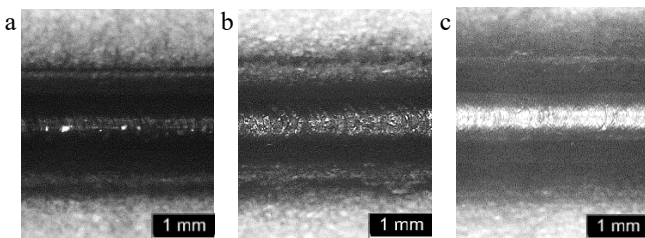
Upper views of the weld beads: (a) 500 W and 500 mm/min; (b) 700 W and 900 mm/min; (c) 900 W and 1100 mm/min.
